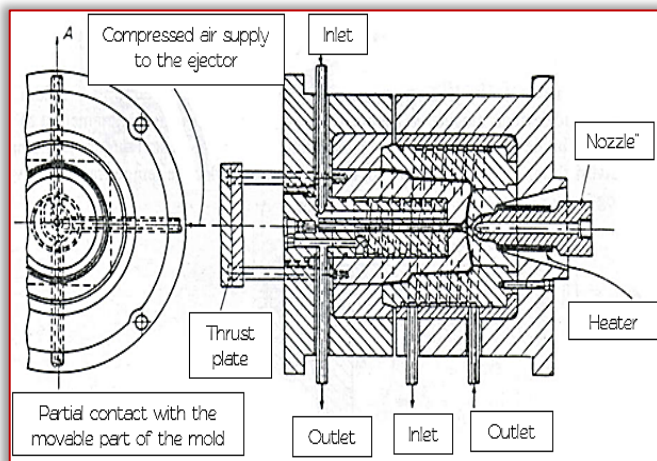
Cooling of the plastic injection moulding tool at GRUNER
